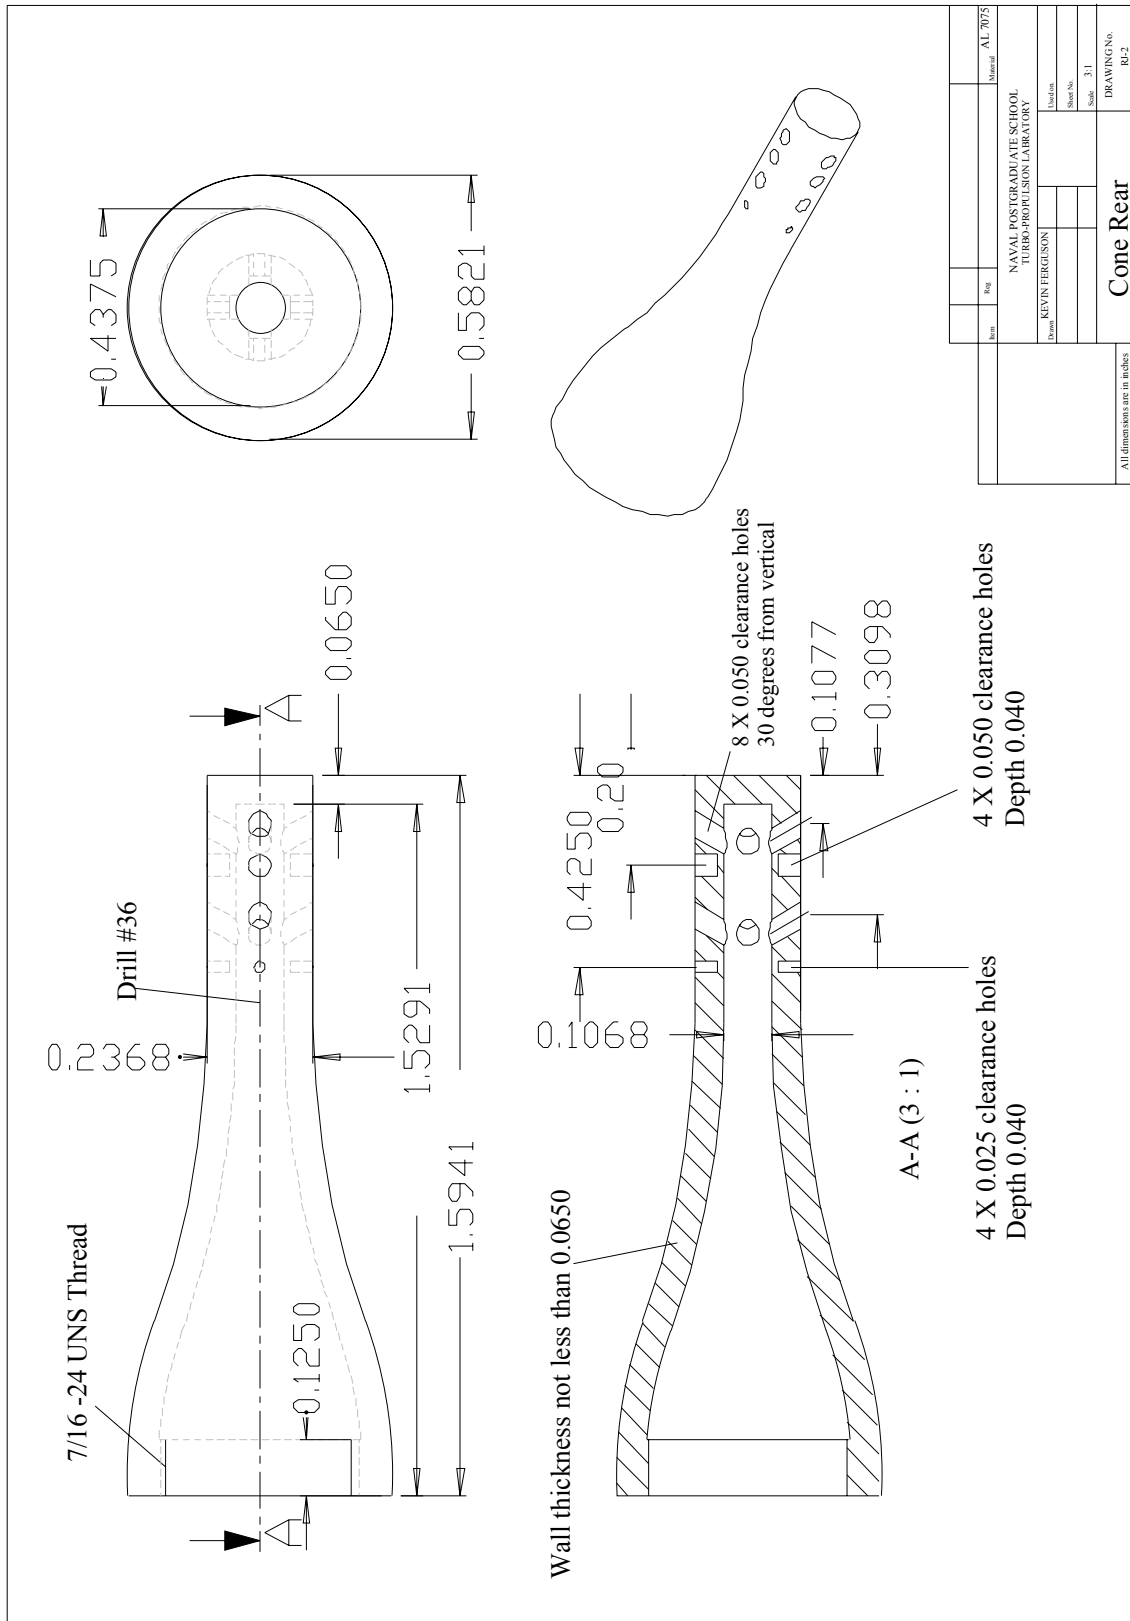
Part drawing: Rear of inlet nose cone (RJ-2)
